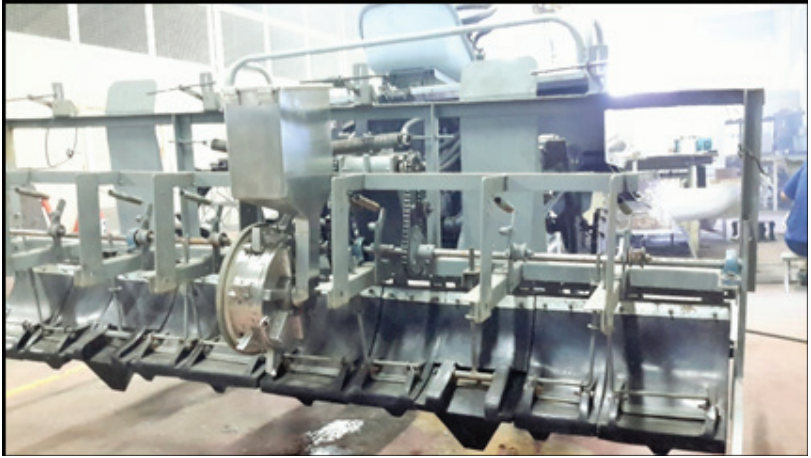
The frame of the seed metering assembly with floater, leveler and canalets.
